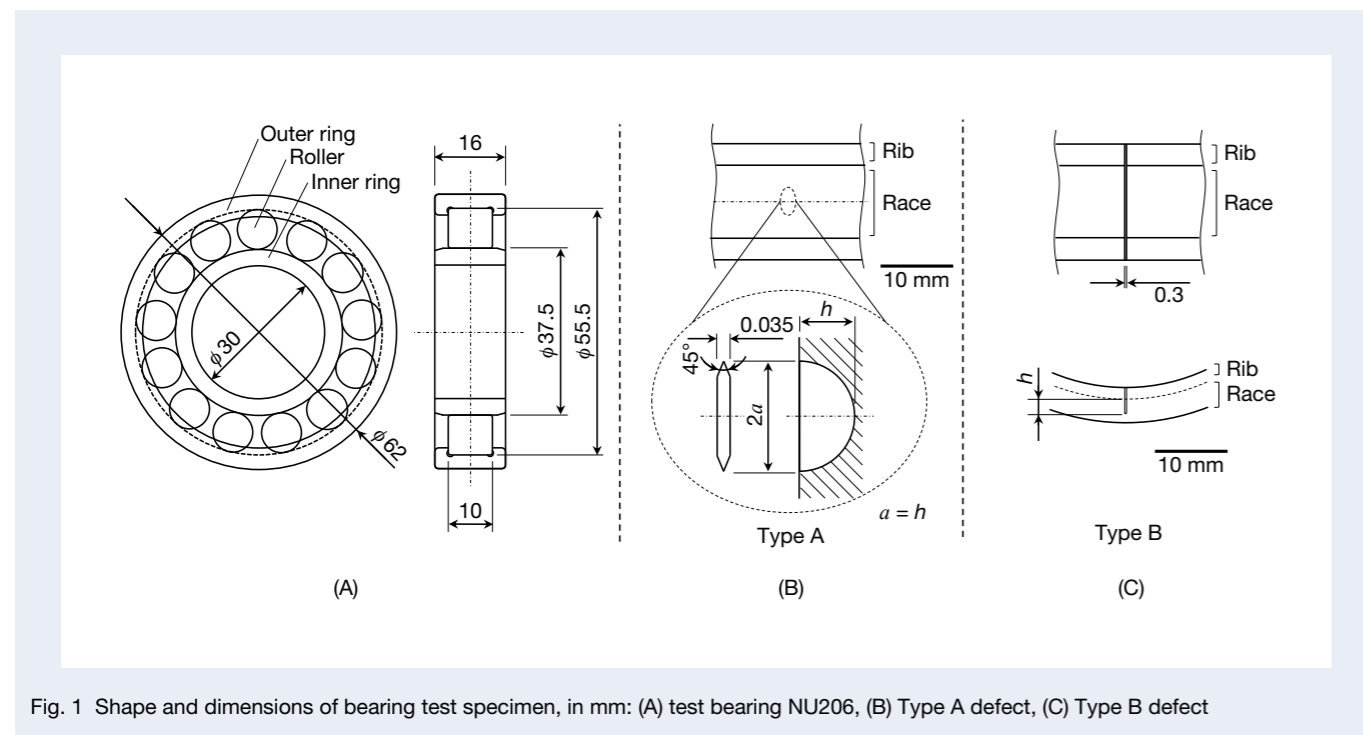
Shape and dimensions of bearing test specimen, in mm: (A) test bearing NU206, (B) Type A defect, (C) Type B defect
